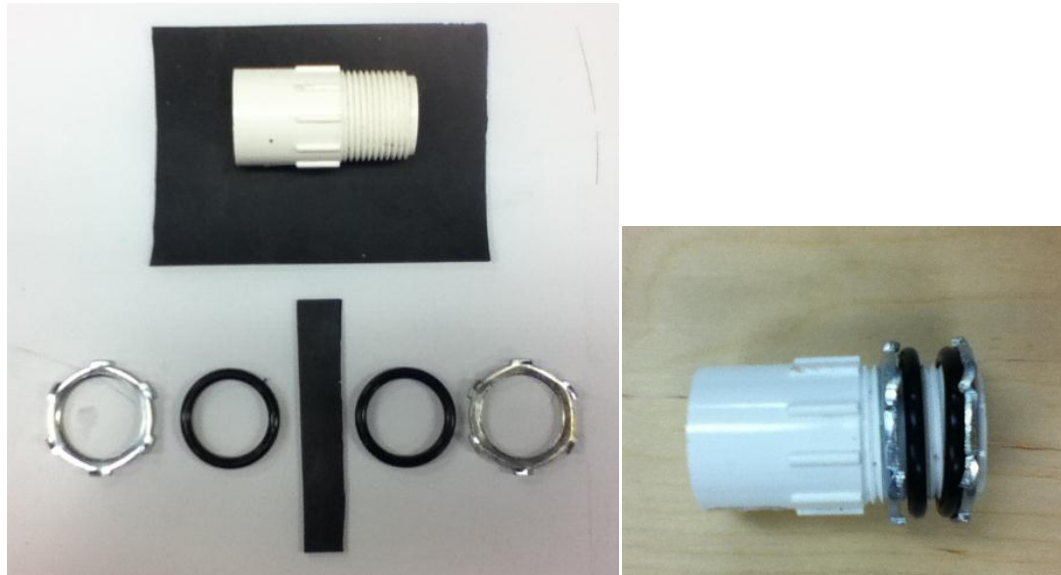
O-ring/locknut fitting is screwed onto the pvc fitting (top). Exploded view from left to right in order on the fitting: locknut, o-ring, reservoir wall (represented in black), o-ring, locknut. Shown on the right assembled.
